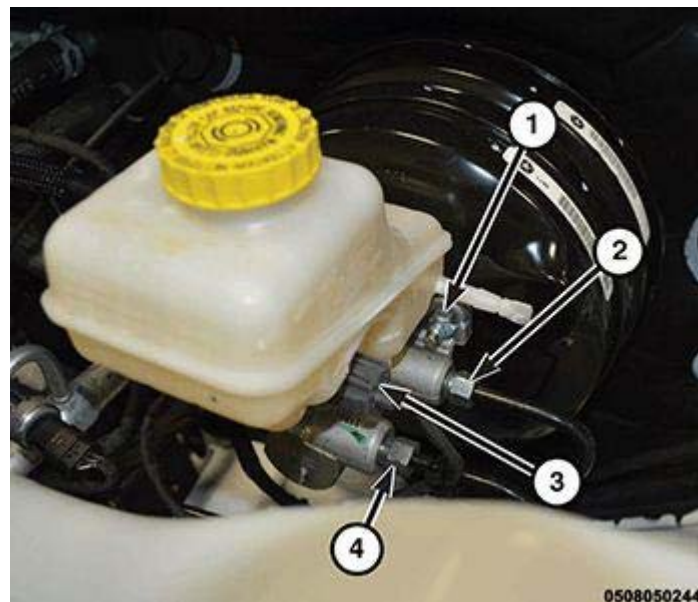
Master Cylinder To Brake Booster Nut, Primary And Secondary Outlet Ports & Brake Fluid Level Sensor Wire Harness Connector
